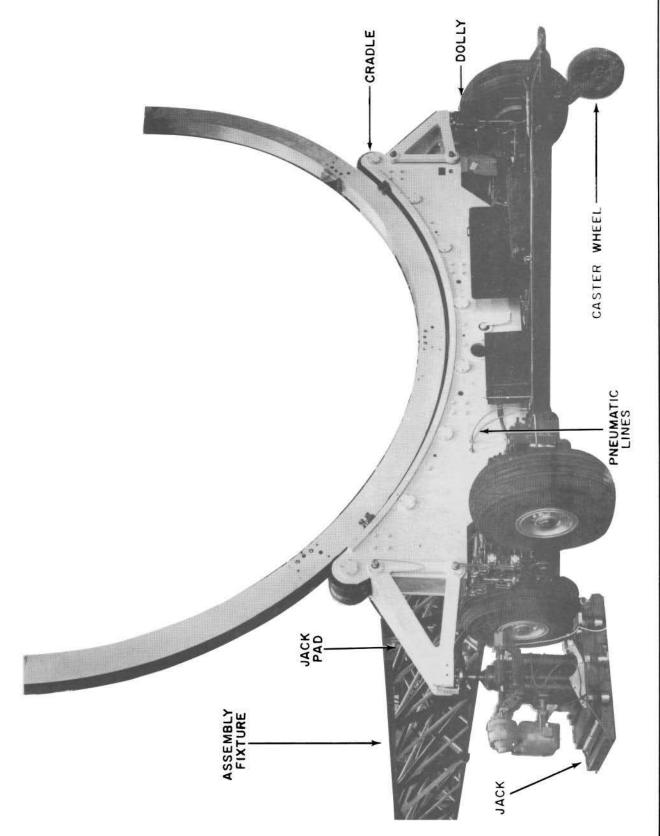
REMOVING AND INSTALLING DOLLY TO ASSEMBLY FIXTURE
